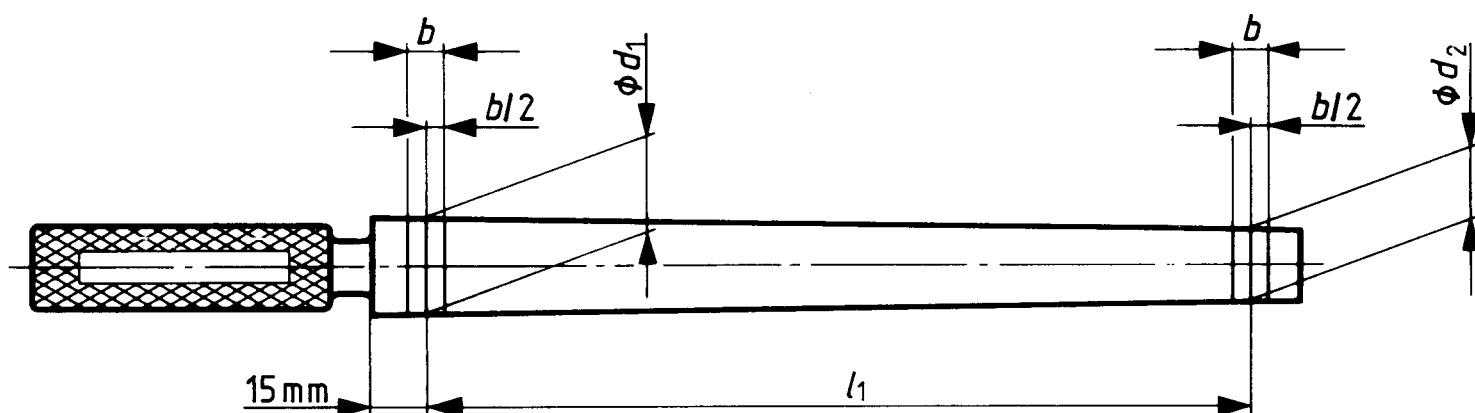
a) – Gauge with taper 1 : 38 for tubes type A
